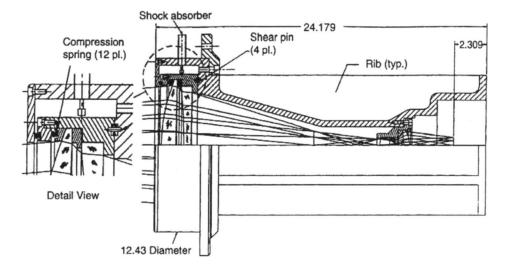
Sectional view of a collimating lens assembly designed to withstand high shock loading. Dimensions are in inches. (Courtesy of Janos Technology, Inc. Keene, NH)
